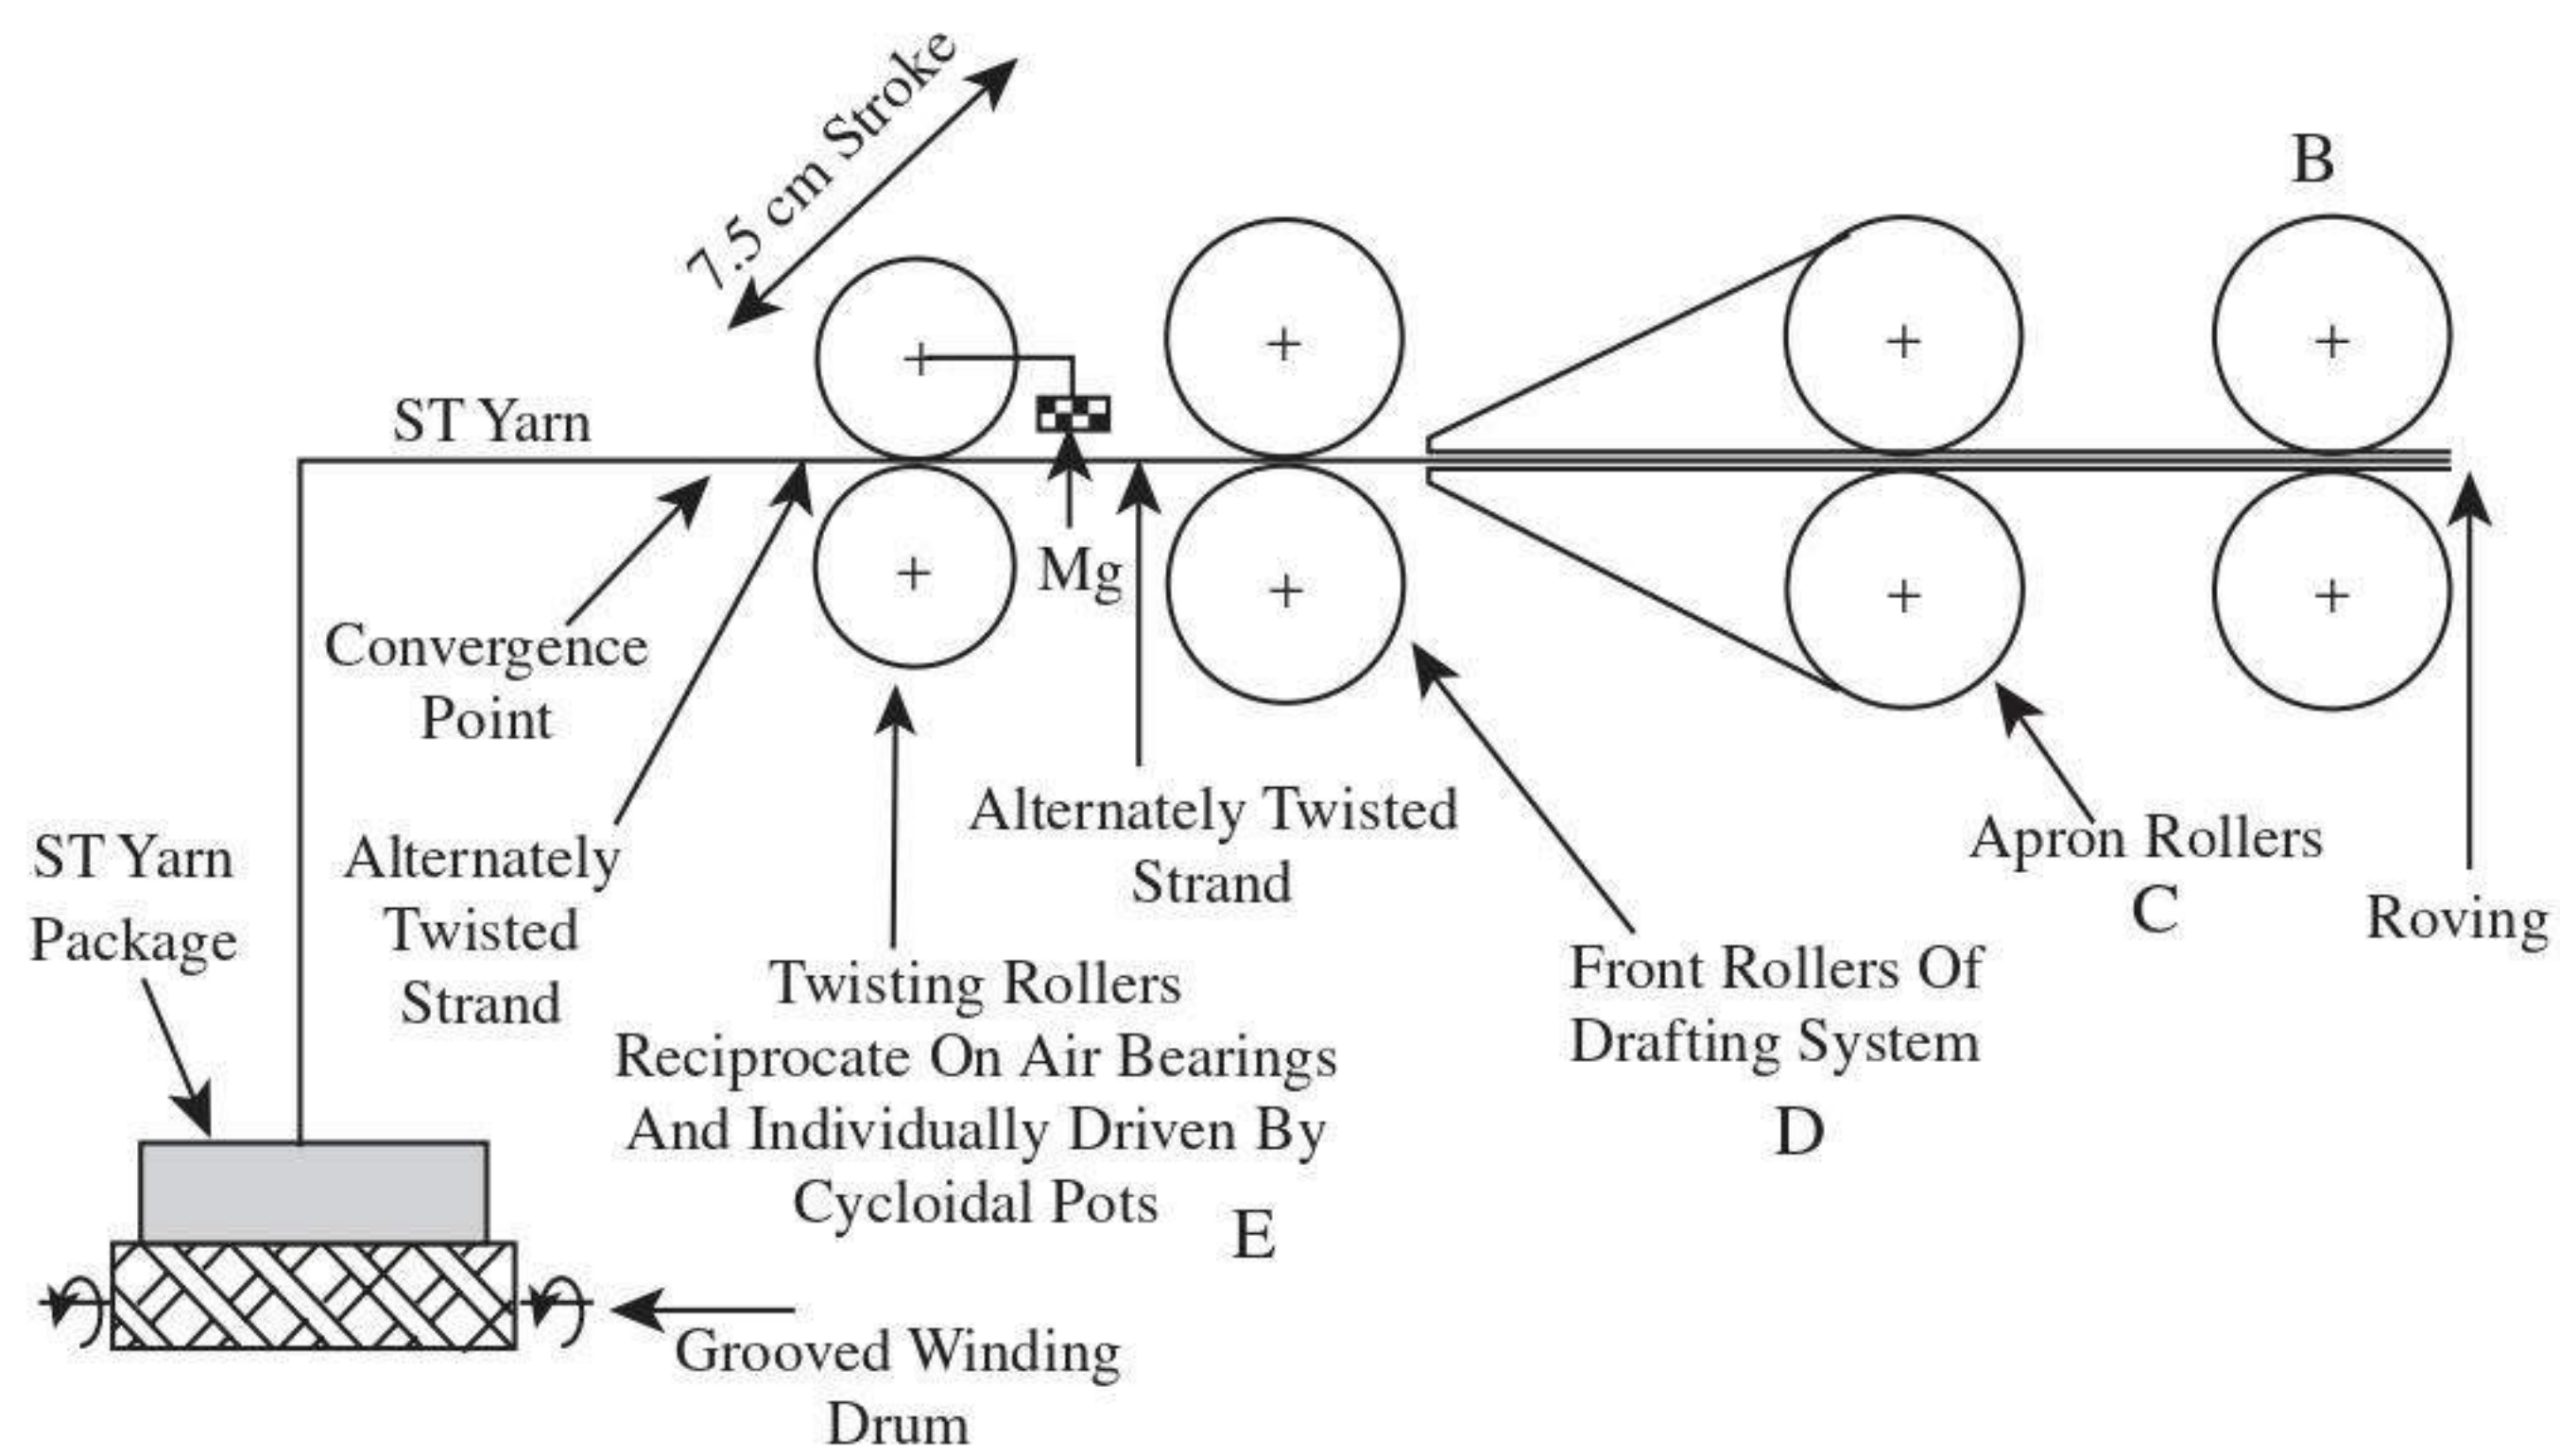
(See color insert.) Repco ST spinning system. A. Roving feed, bottom drafting rollers, and apron. B. Top rear, drafting roller. C. Top apron of drafting system. D. Special grooved top, front drafting roller. E. Reciprocating friction rollers.
